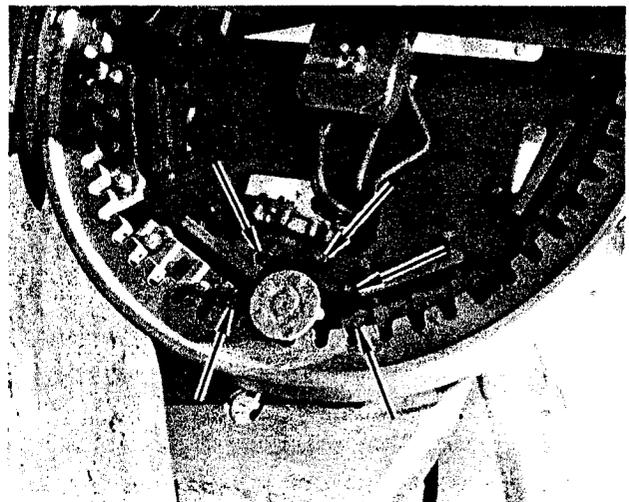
GEAR HOUSING MOUNTING CAPSCREWS
